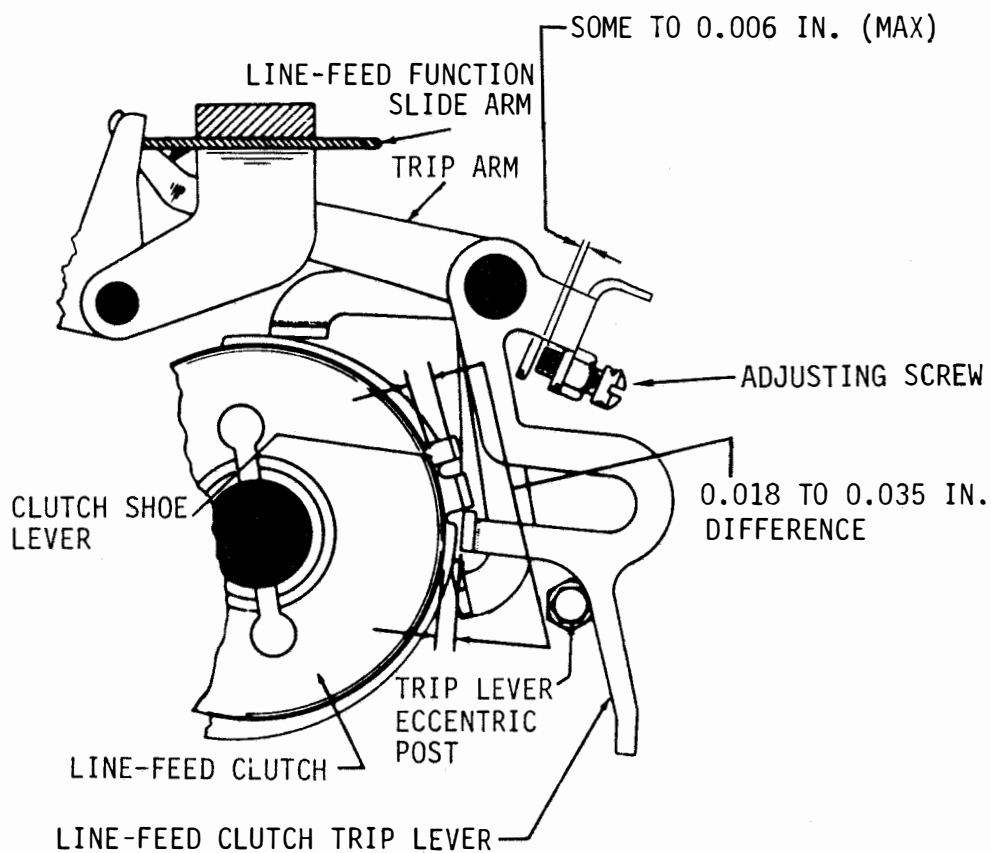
Line-Feed Clutch Trip Lever Eccentric Post and Adjusting Screw, Right Side View
